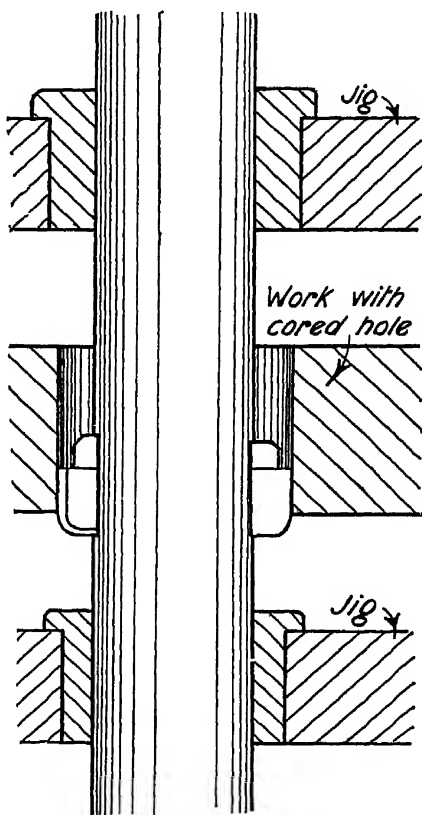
ARRANGEMENT OF JIG FOR BORING CORED HOLES IN A DRILLING MACHINE
